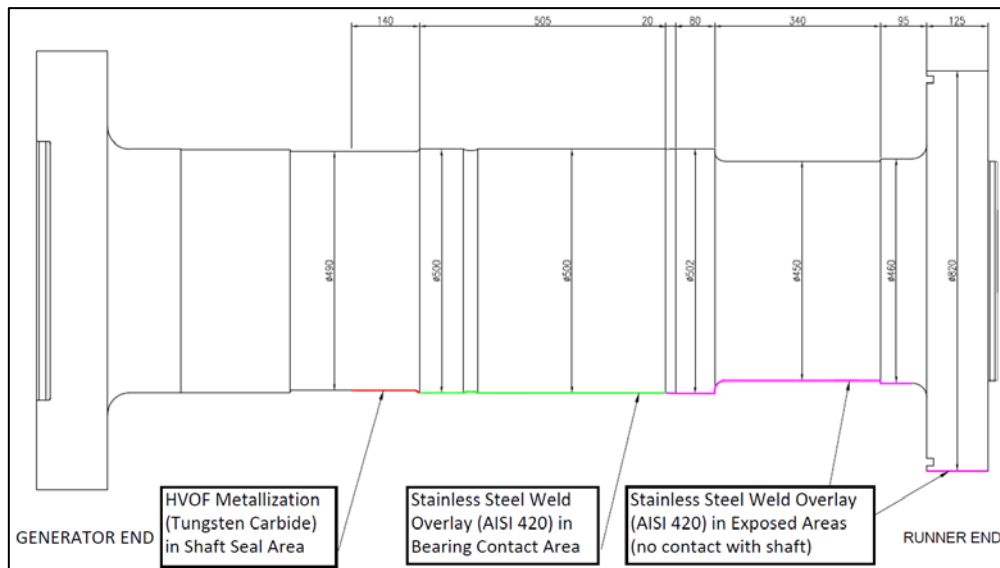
Shaft Corrosion Protection (Drawing provided courtesy of local workshop - Milsa Trillo S.A.)
